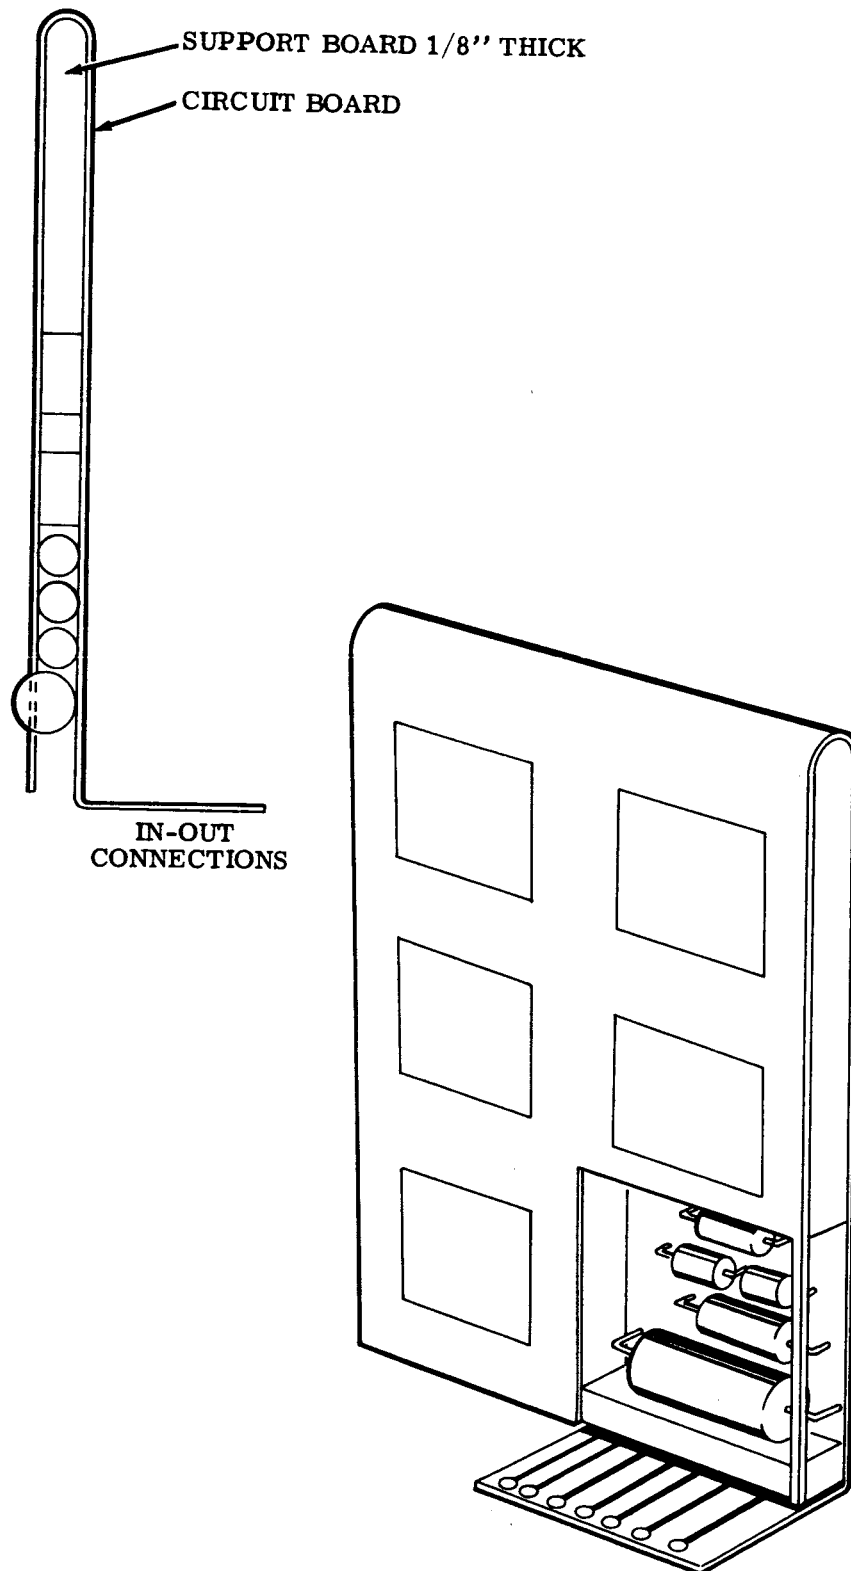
Sketch Showing the Use of Flexible, Printed Circuit Board
